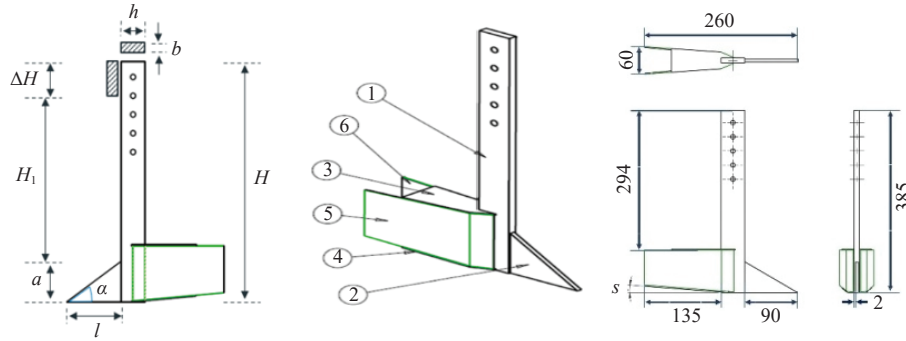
Shoe-type furrow opener (1: Shank; 2: Share; 3: Boot upper cover; 4: Boot bottom; 5: Boot; 6: Inner side of boot part ($b \times h$ = shank cross-sectional area, mm; l : Length of shoe, mm; α : Rake angle, deg; K_o : Specific soil resistance, kg/cm²; H : Height of shank from the tip of opener to the frame, mm; and ΔH : Upper length of tine which is used for fastening, mm)
